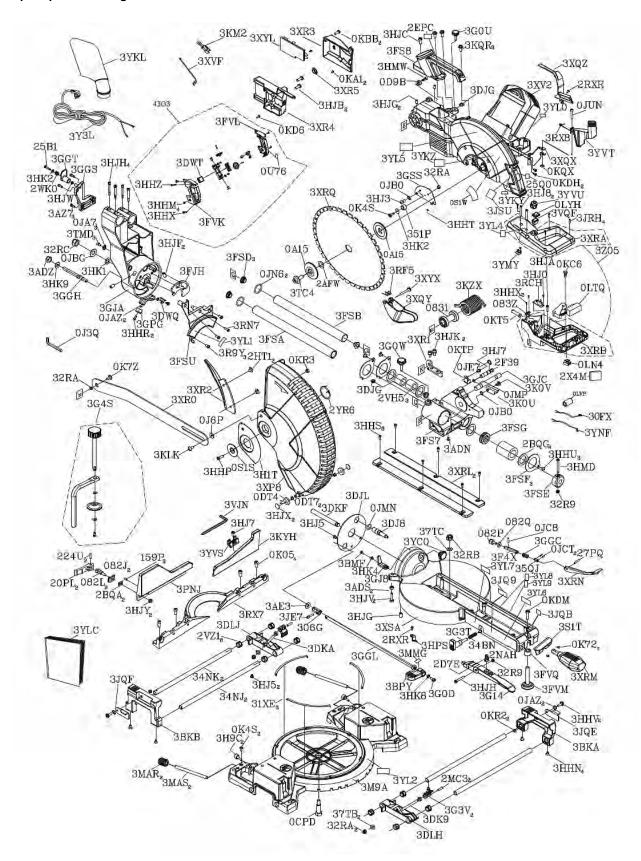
Spare parts drawing 1 KGZ 3050 VARIO
